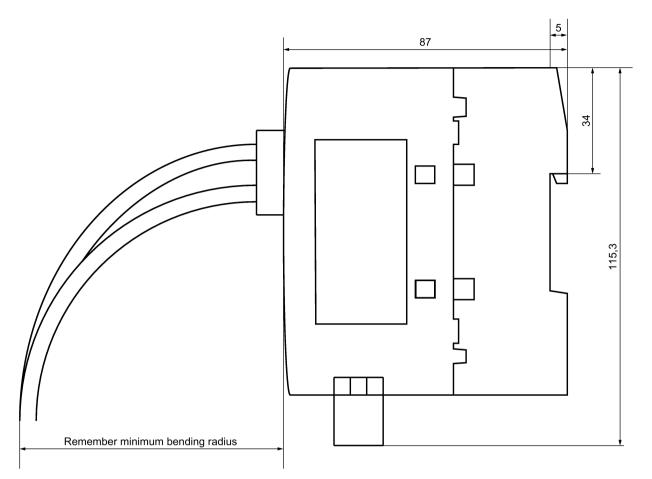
Dimension drawing, side view (example: SCALANCE XB004-1)
